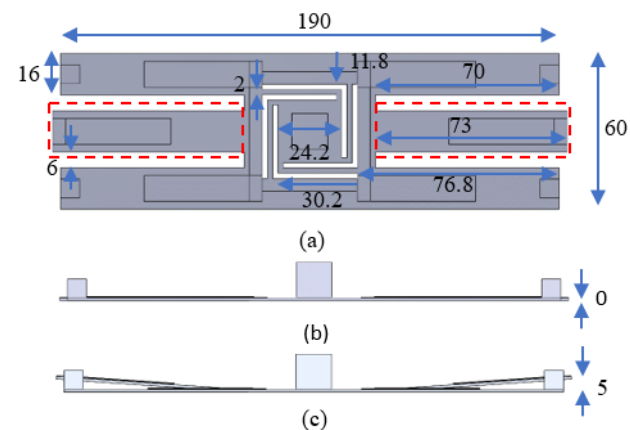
The dimension of the harvester: (a) top view; (b) side view (planar); (c) side view (after pre-load). Dimensions are in mm.
